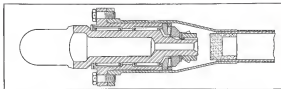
Mounting utilizing direct thrust taper roller bearing
